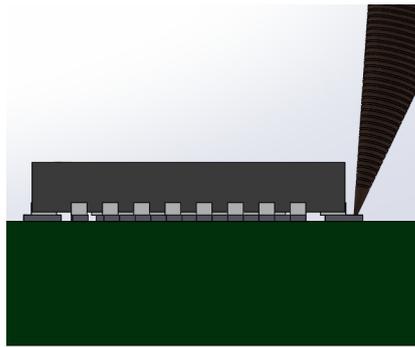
Simulation assembly for the soldering process experiment – MLF-32
